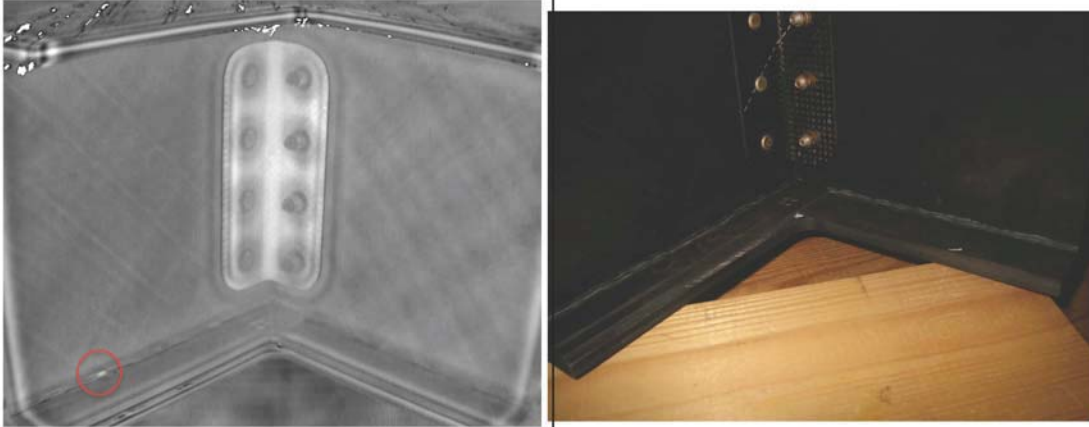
Thermal inspection results for cruciform 1, rivet 4 bottom.
